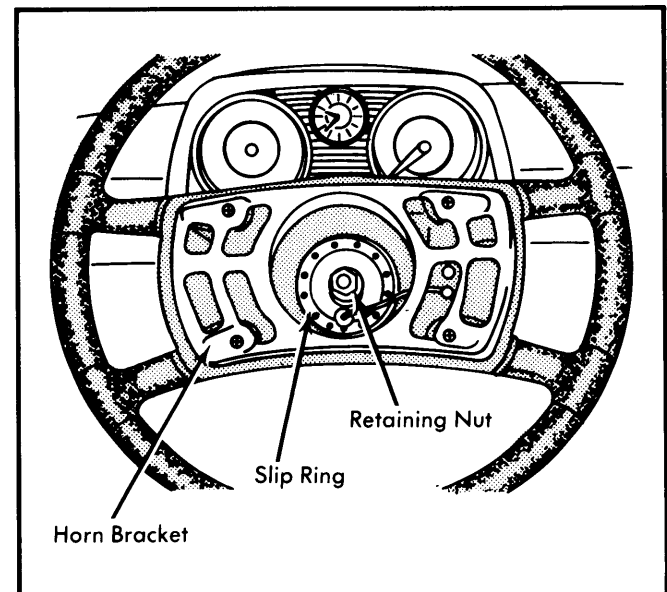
Mercedes-Benz Steering Wheel with Cover Removed
